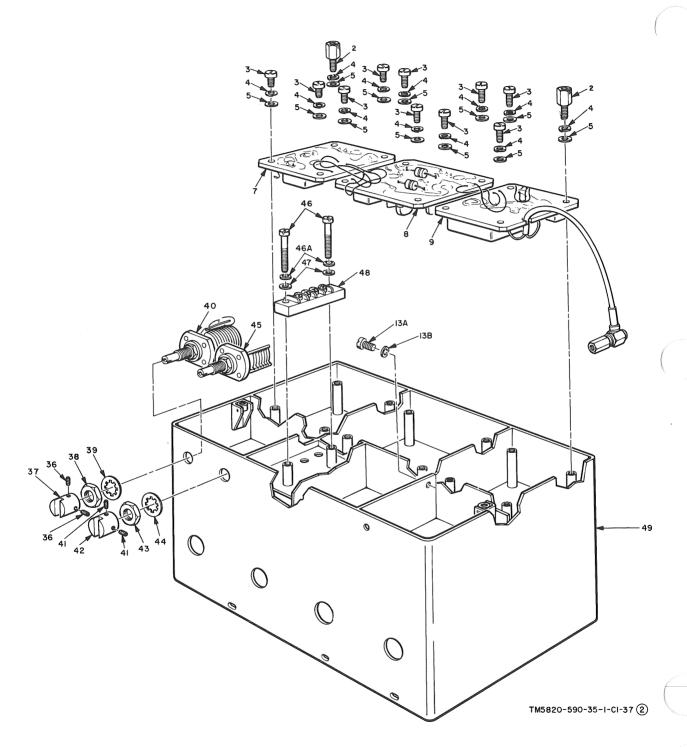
②. Frequency synthesizer module, exploded view (part 2 of 2).
